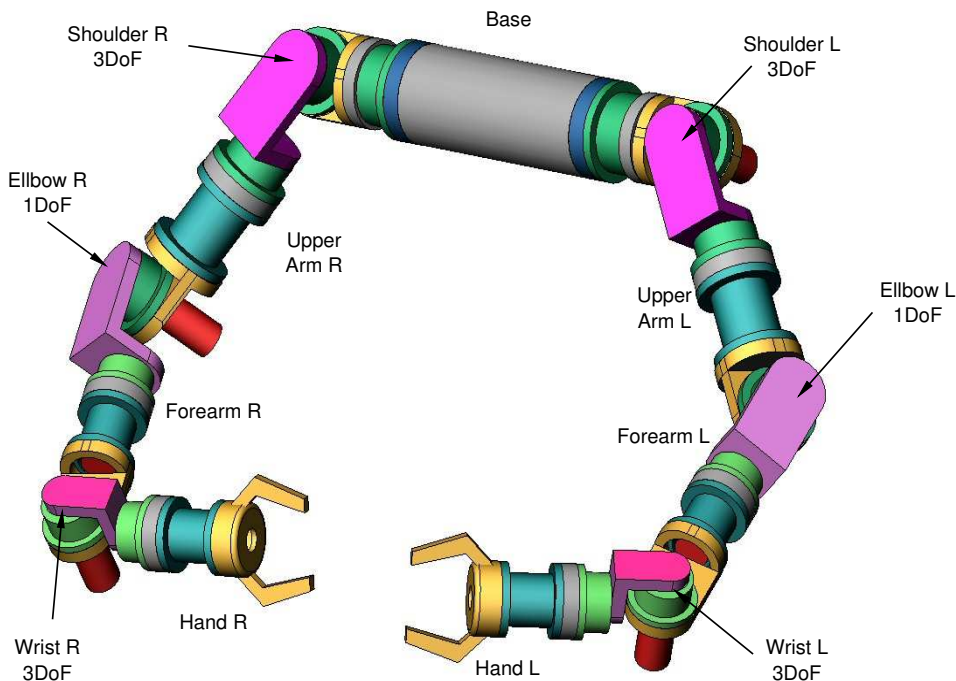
Design of the dual arm telerobotic manipulator: CAD drawing, front view
